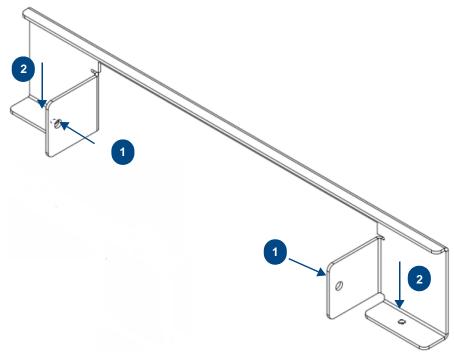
NMX-MM-RKA Enzo Rack Mount Adapter
